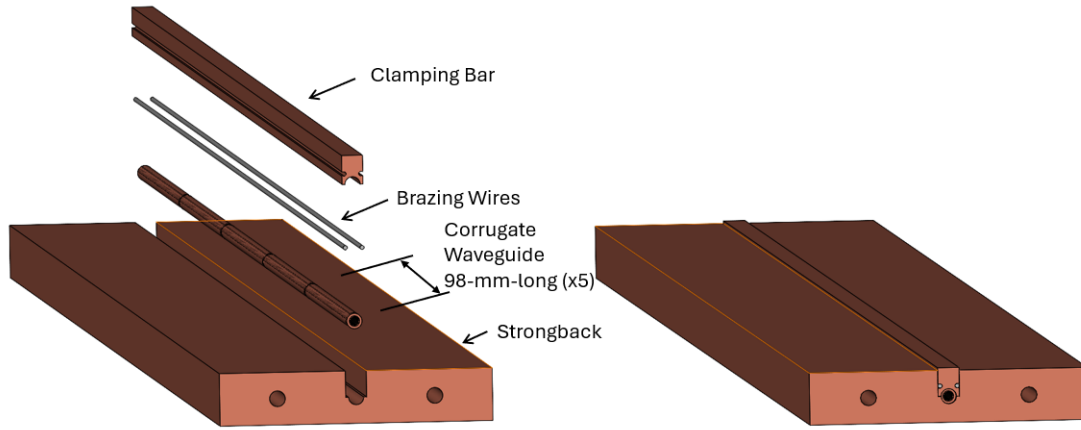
Brazing the 0.5 m-long waveguide assembly.
